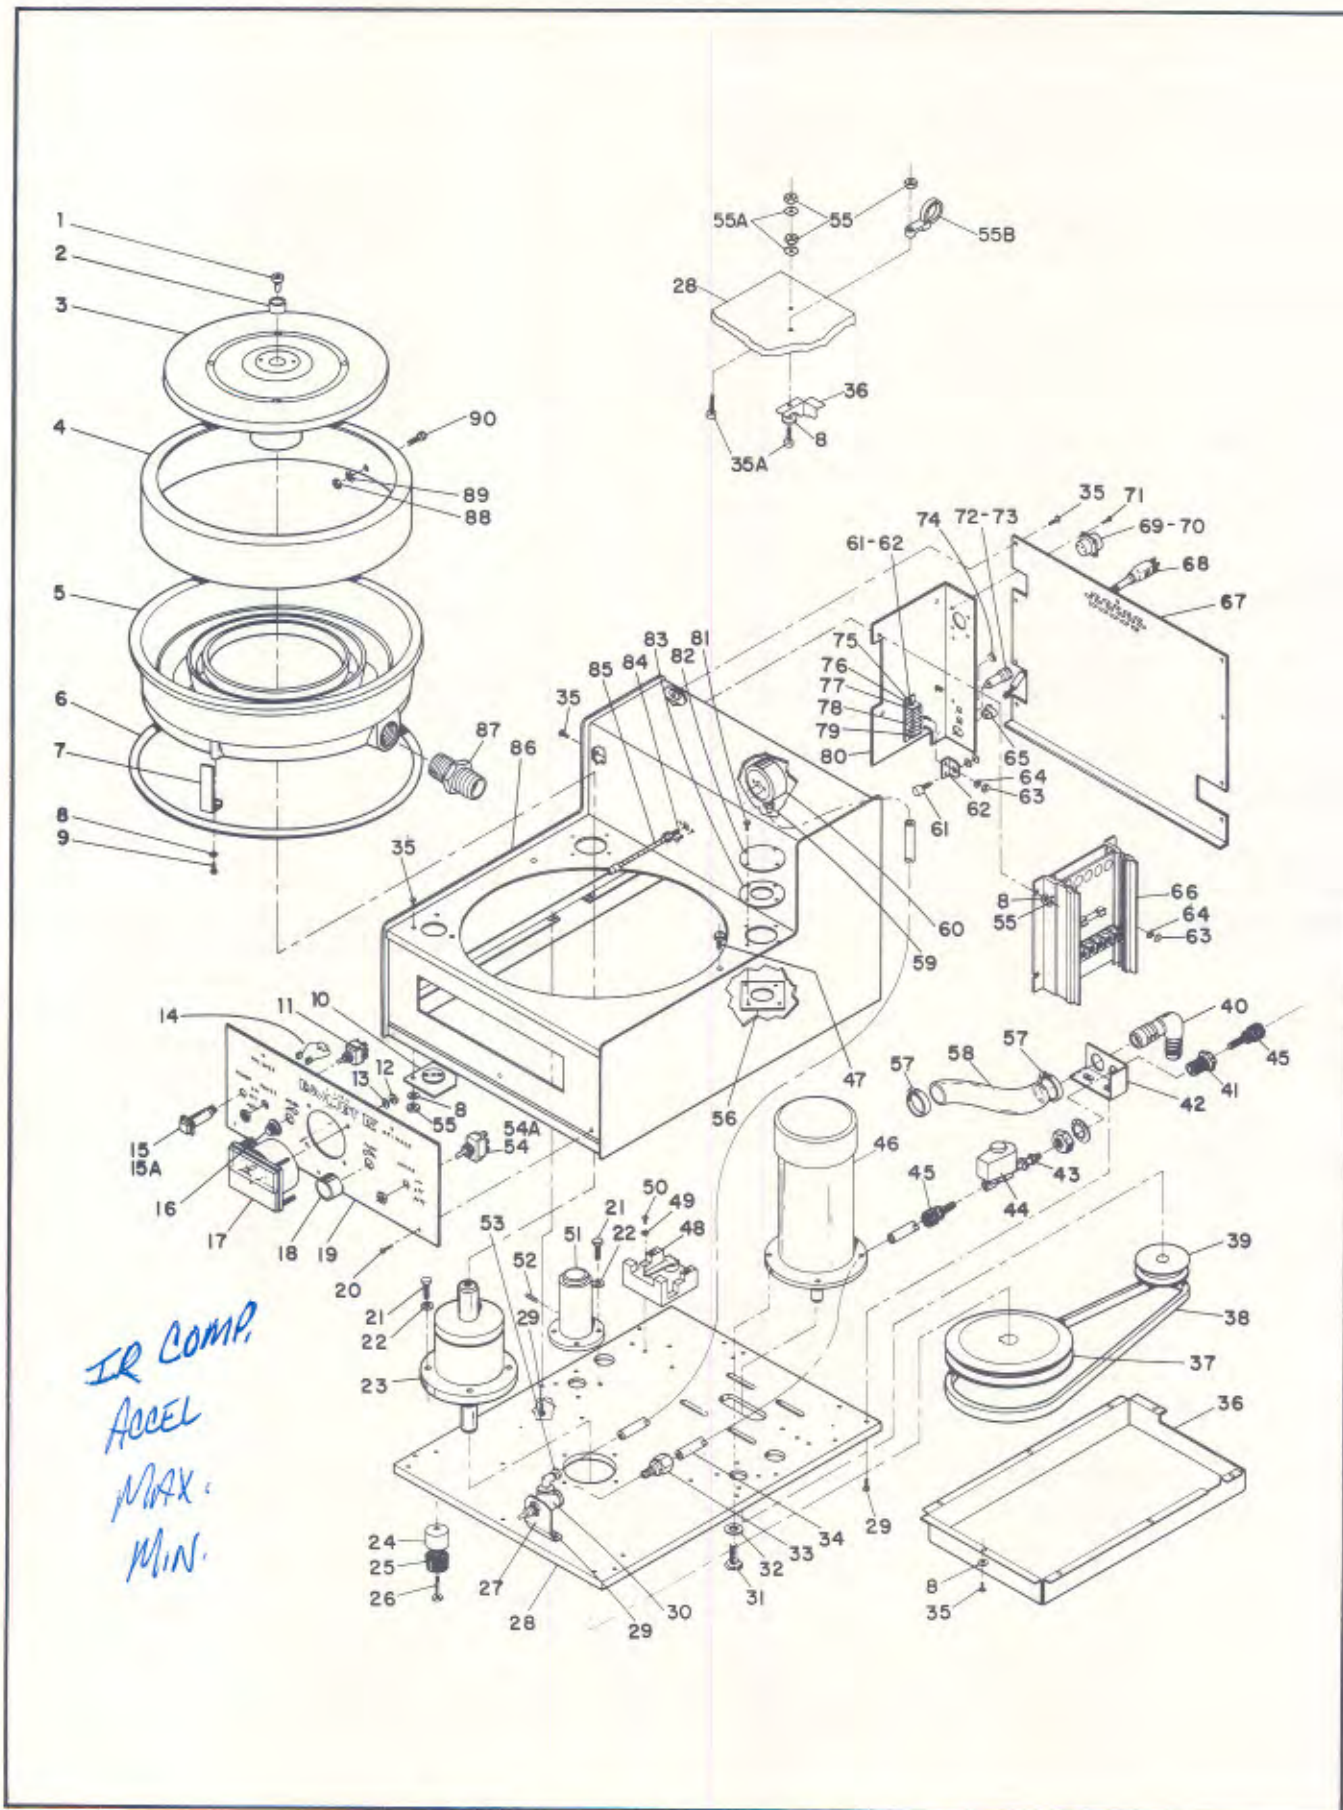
ECOMET® IV ASSEMBLY DETAIL
